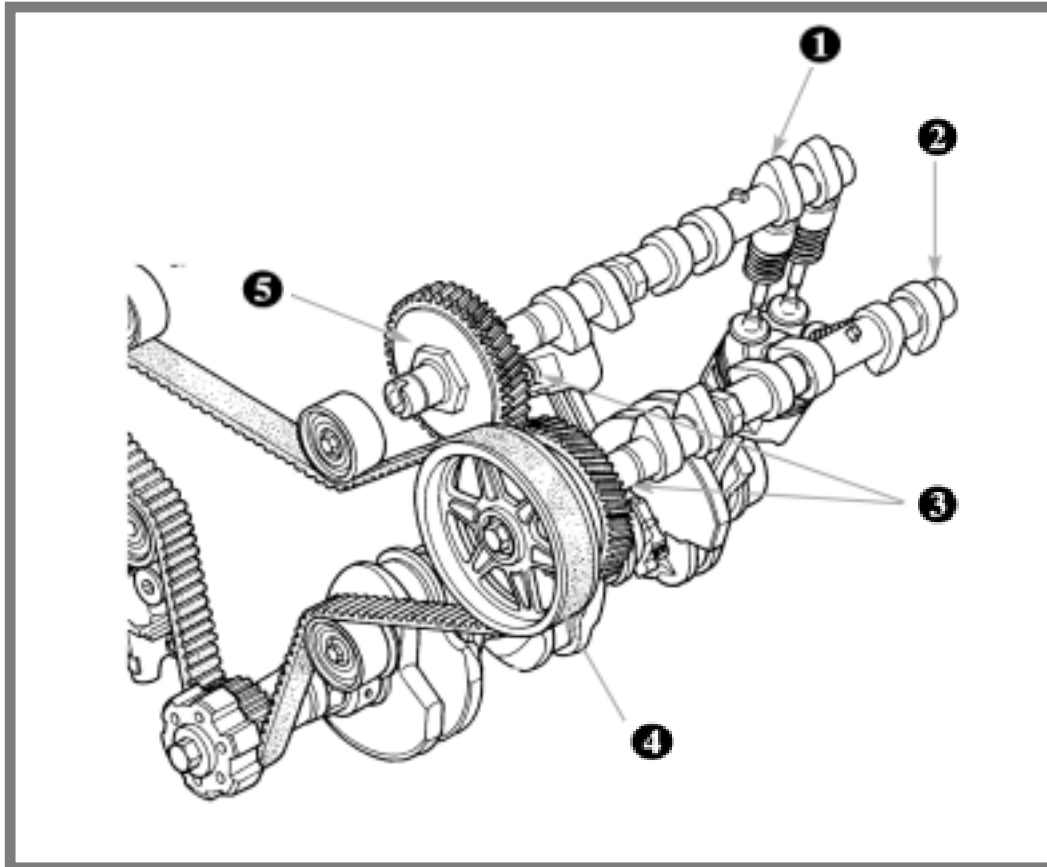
The drive camshaft is driven by the timing belt. The driven camshaft is driven by helical and friction gears.
